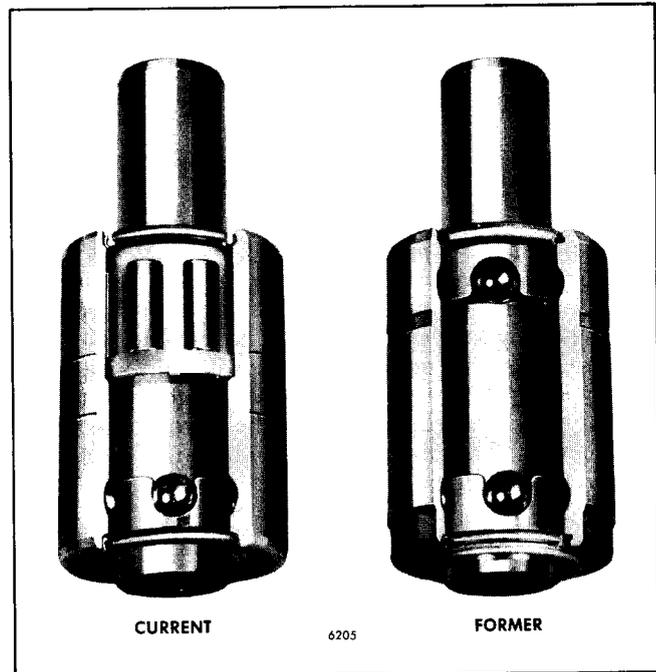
Heavy-Duty Shaft and Bearing Assembly
